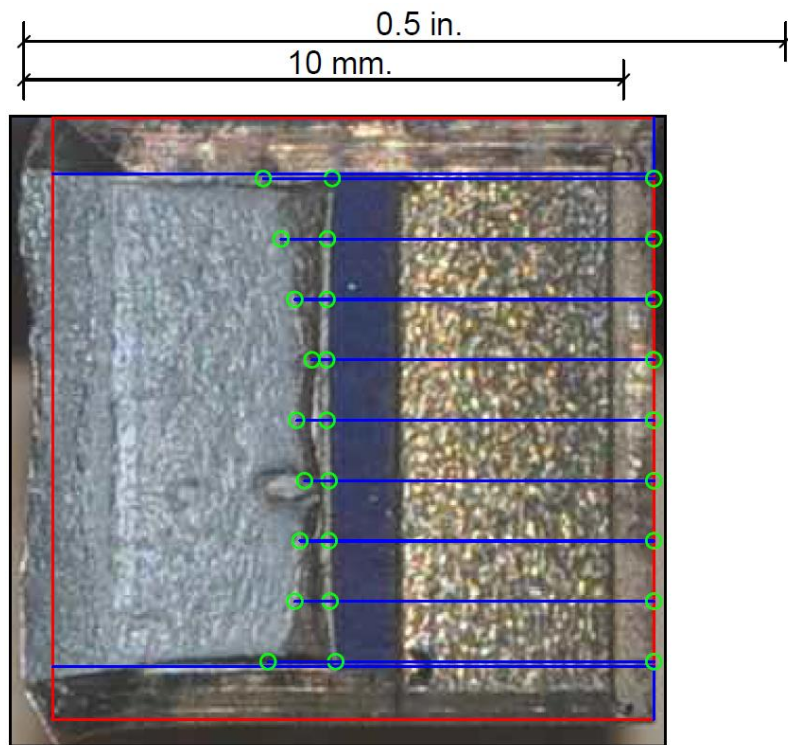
Specimen D11' Fracture Surface
